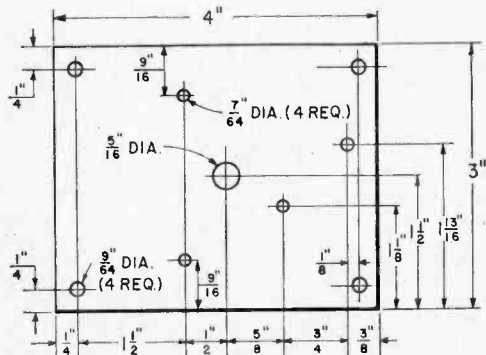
Relay and motor are mounted on this insulating panel, which is mounted over the commutator board, as in Fig. 7.
